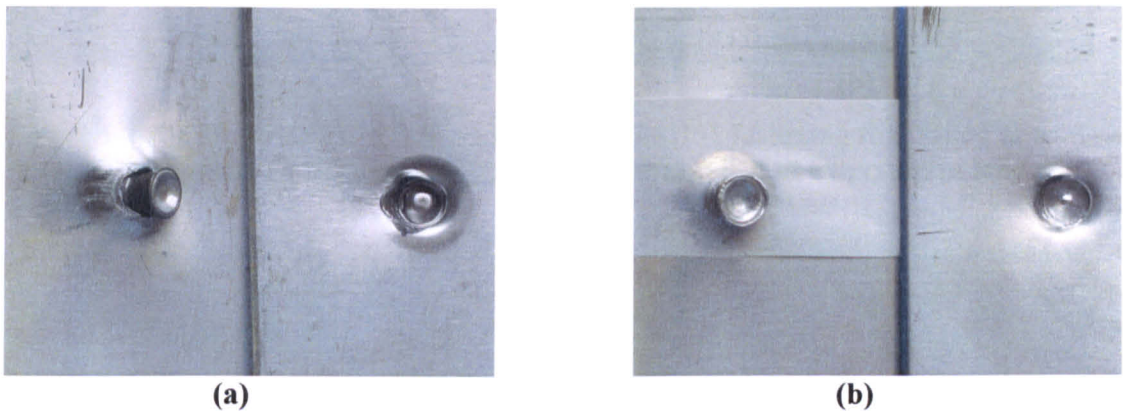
Failure mode for the shear test, (a) rivet pull-out for a FSH51 fastening, (b) rivet pull-out for a FSH52 fastening
